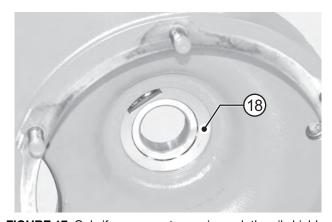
Only if necessary to repair, mark the oil shield plate (18) position before removing.
